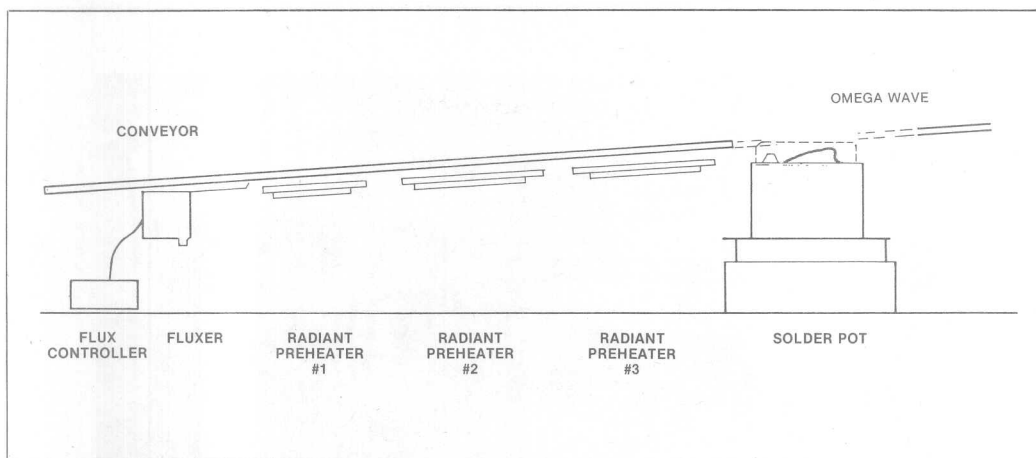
Wave Solder Machine (SMT Arrangement)
